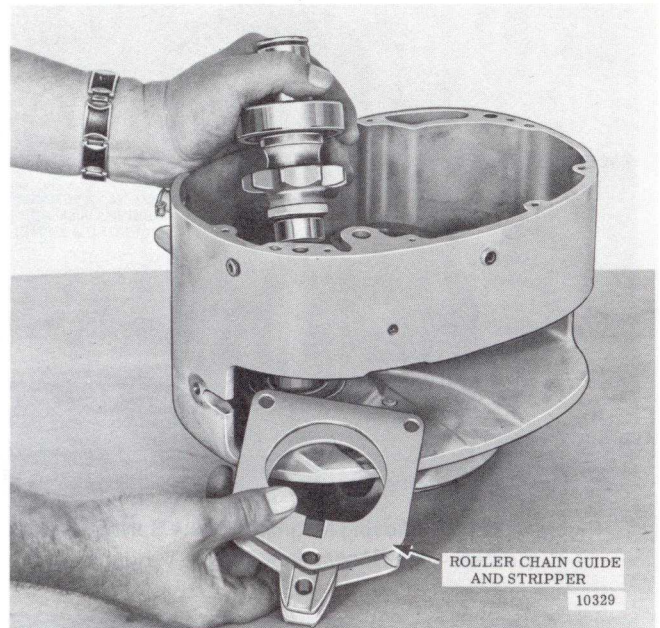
Chain Guide and Stripper Being Removed From Frame as Sprocket Shaft is Lifted Out (Roller Chain Model)
